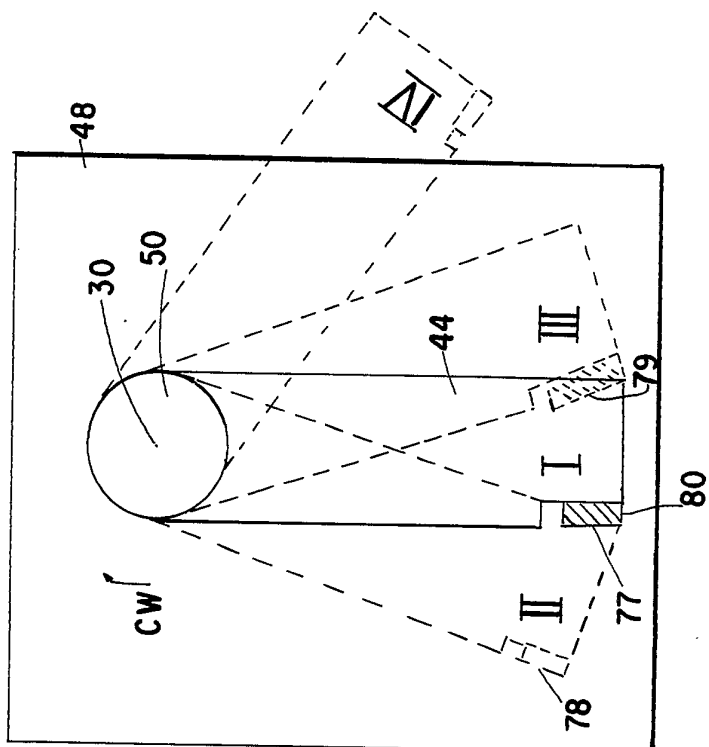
is a cross-sectional view of a mechanical assembly. A central shaft (30) passes through a housing (48). A component (50) is mounted on the shaft. A bracket (44) is attached to the housing. A component (78) is shown at the bottom right.
